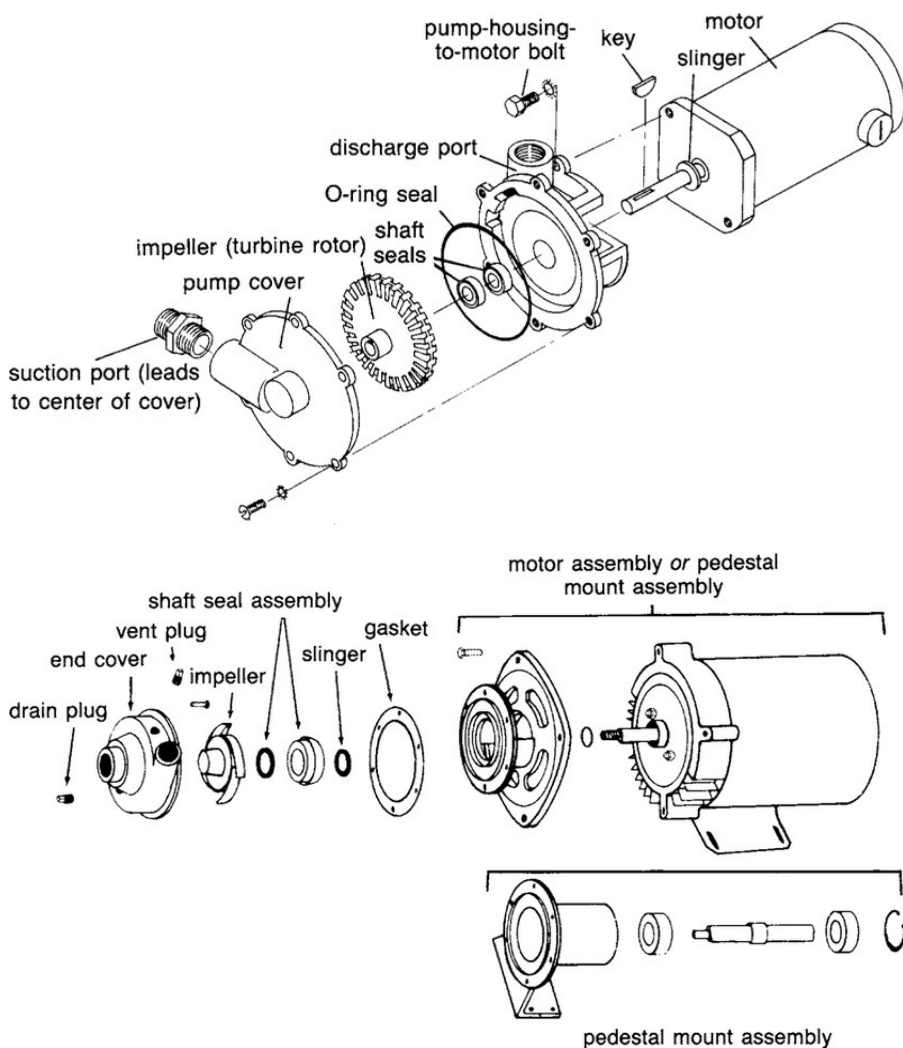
A. An exploded view of a centrifugal pump with a turbine
